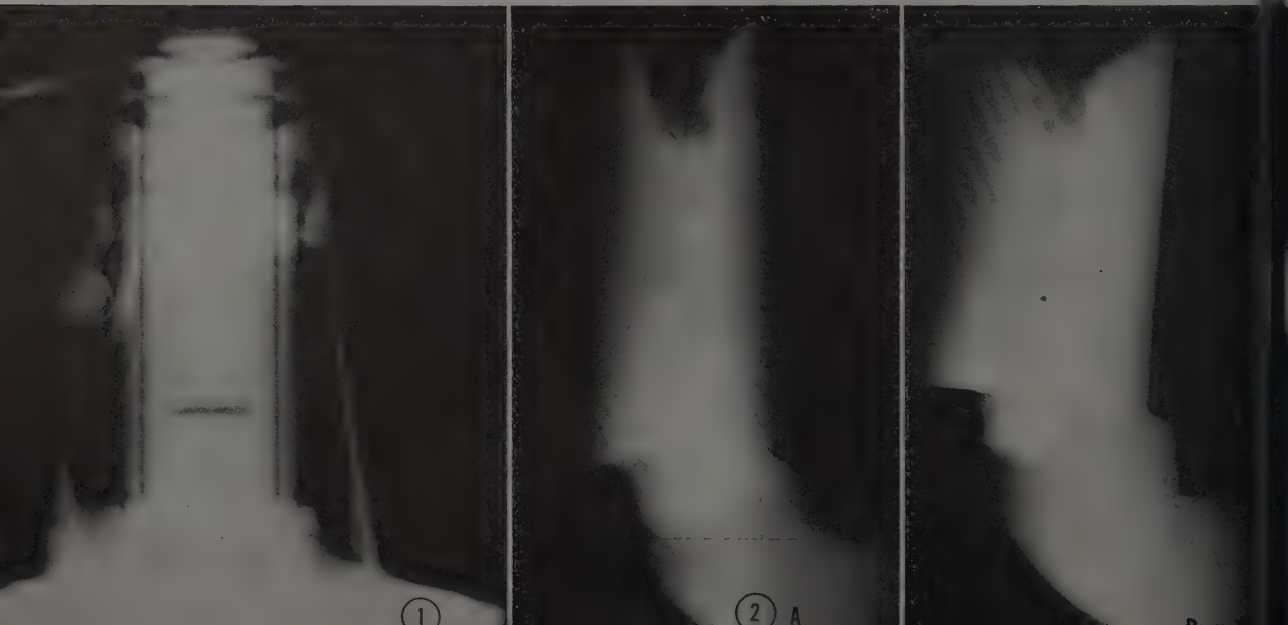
(A) Radiograph of motor housing before reduction in weight effected in sprue-and-runner. (B) Sprue-and-runner on motor housing after reduction of 5½-lb. Despite reduction, no cavitation extends into casting proper
